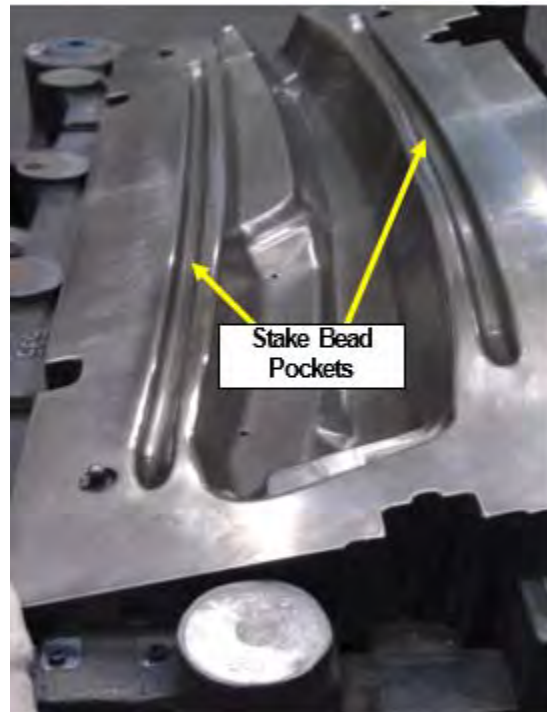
C-26B: Stake bead pockets machined into the upper draw die. Note that there are no draw beads on this blankholder.
